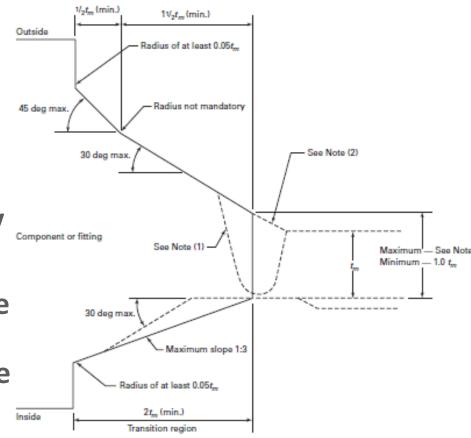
Welding End Transition - Maximum Envelope
